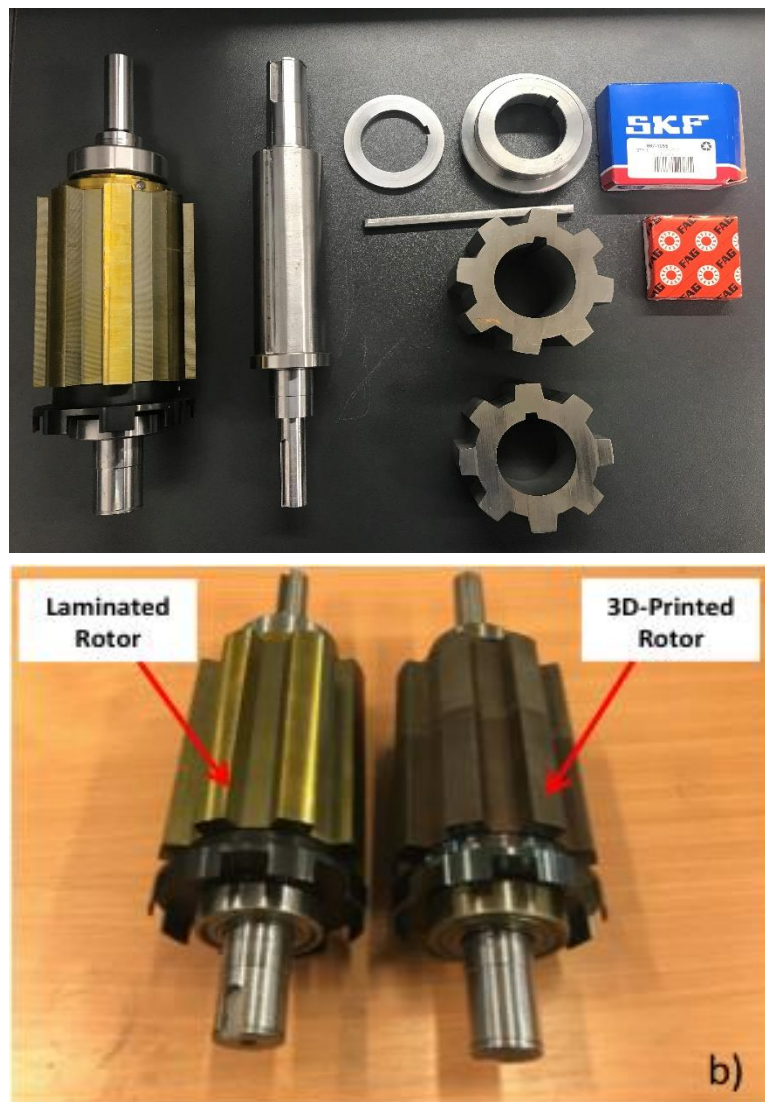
Conventional laminated 8-pole SRM rotor (left-hand side) and identical 3D printed rotor (right-hand side) a) before and b) after assembly.
